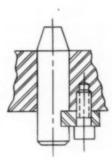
Key and cap screw retainer. Core may be removed from parting line.
